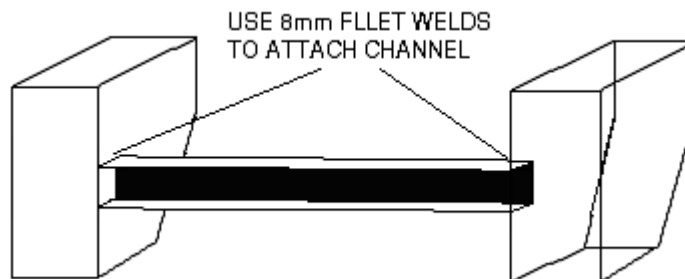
Welding of channel section to front hangers
